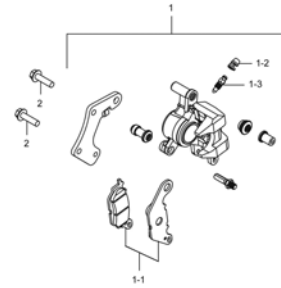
FRONT BRAKE CYLINDER (P05-S430-0011)
